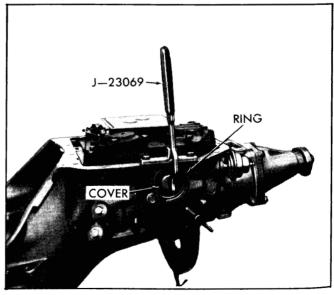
Removing 1-2 Accumulator Piston Cover Retaining Ring
